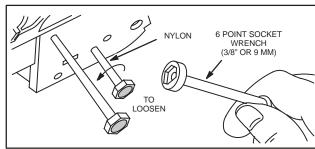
REMOVING NYLON FUEL PICK-UP TUBES
